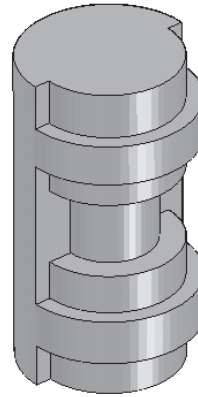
Resulting revolved cutout created by removing the material on the right of the profile
